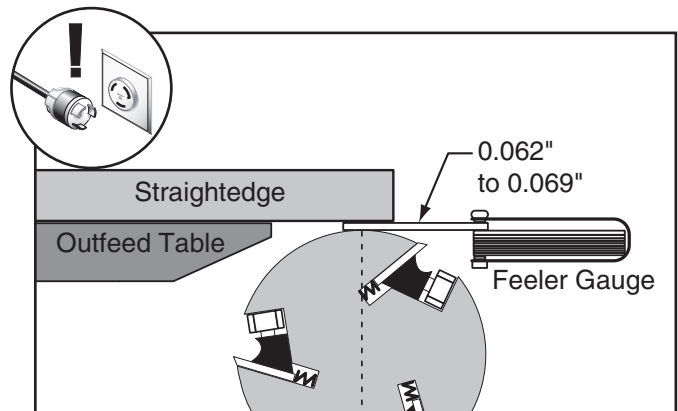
Using feeler gauge to check outfeed table-cutterhead height.
